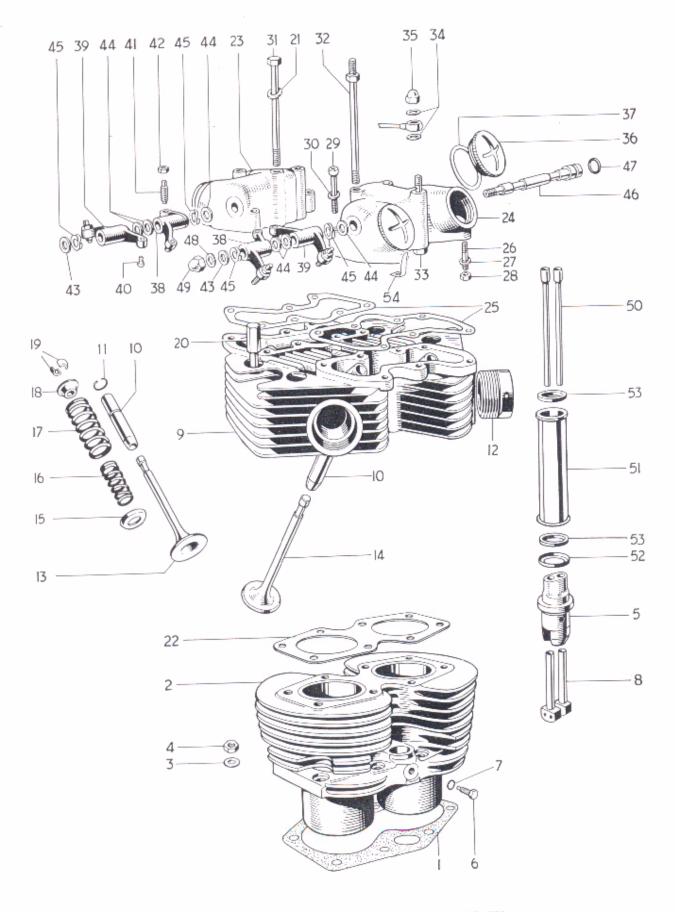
CYLINDER BLOCK AND HEAD, 3TA AND T90
